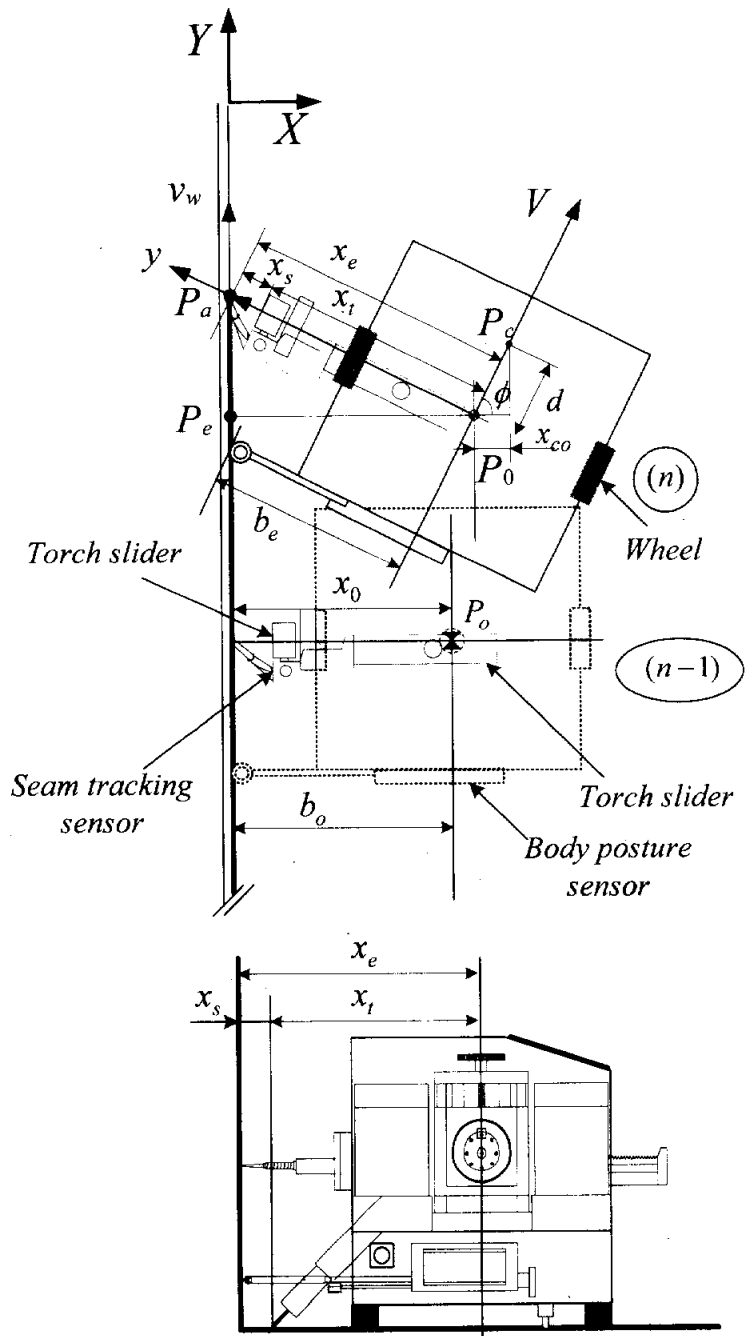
Torch length and mobile robot velocity for lattice welding
